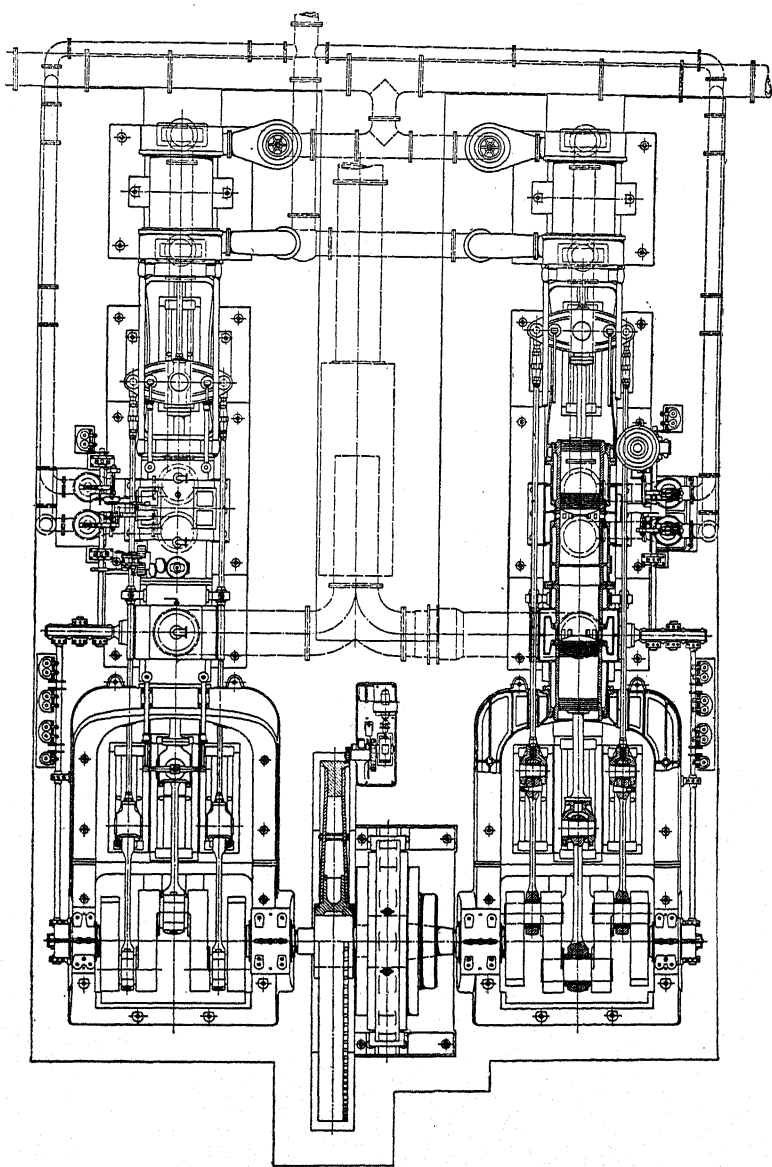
,000-H.P. OECHELHÄUSER TWIN ENGINE, BY A. BORSIG, BERLIN. (Plan.)
